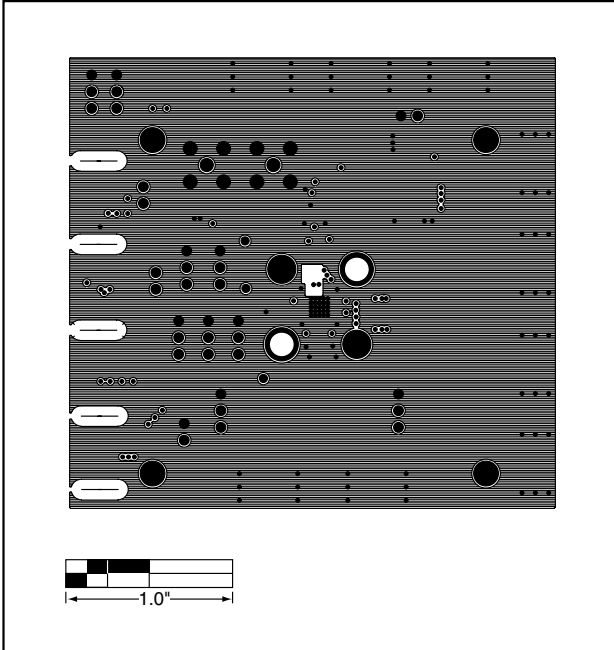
MAX3670 EV Kit PC Board Layout—Ground Plane
